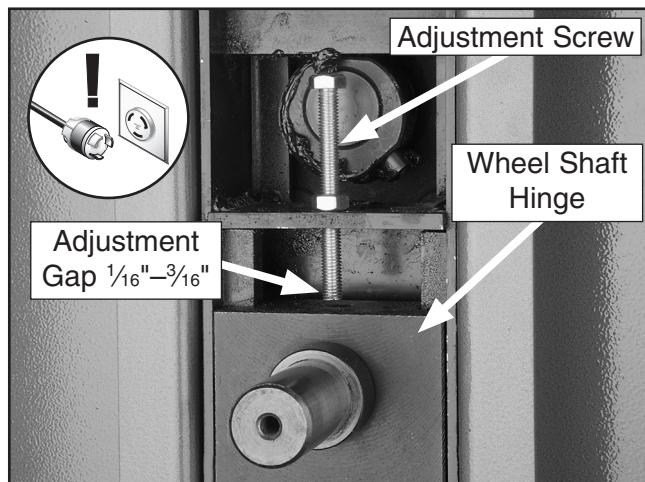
Tension lever adjustment components (top wheel removed for clarity).
